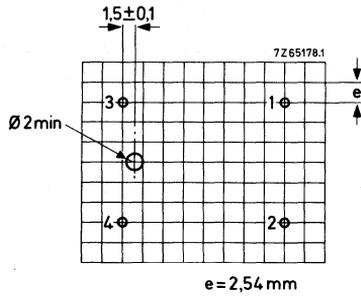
Hole pattern for mounting on a printed-wiring board, hole diameter $1,3 + 0,1$ mm.
